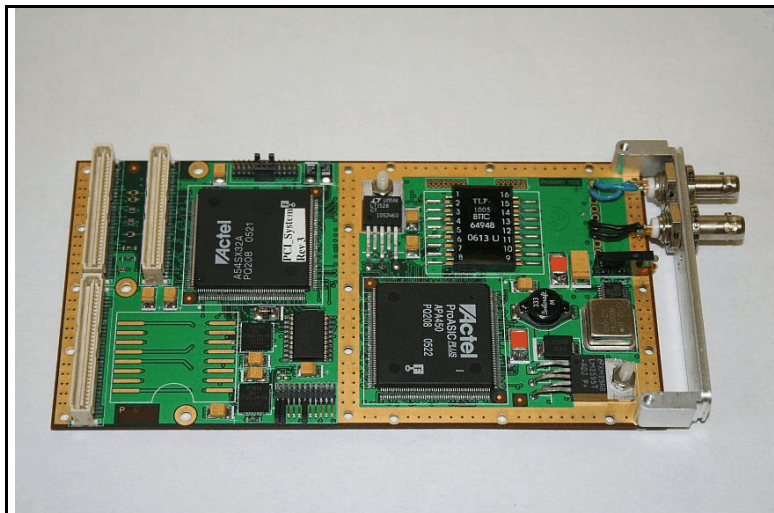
Air-Cooled Adapter with Frontpanel I/O
